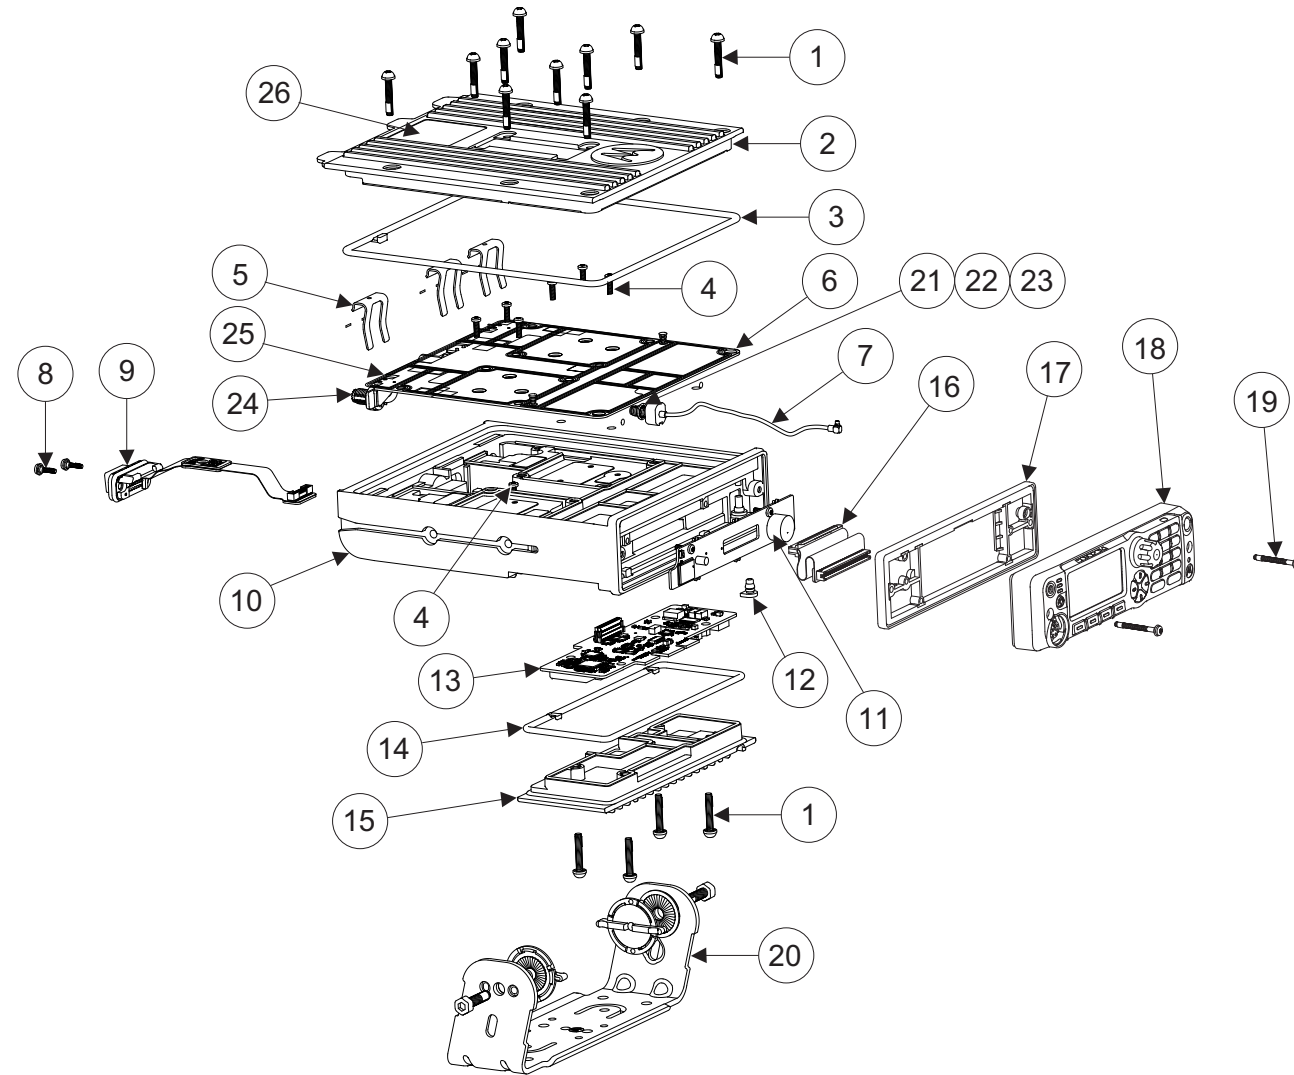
APX 5500 / 6500 / 7500 / 6500 Li O7 Dash Mount Radio Exploded View
